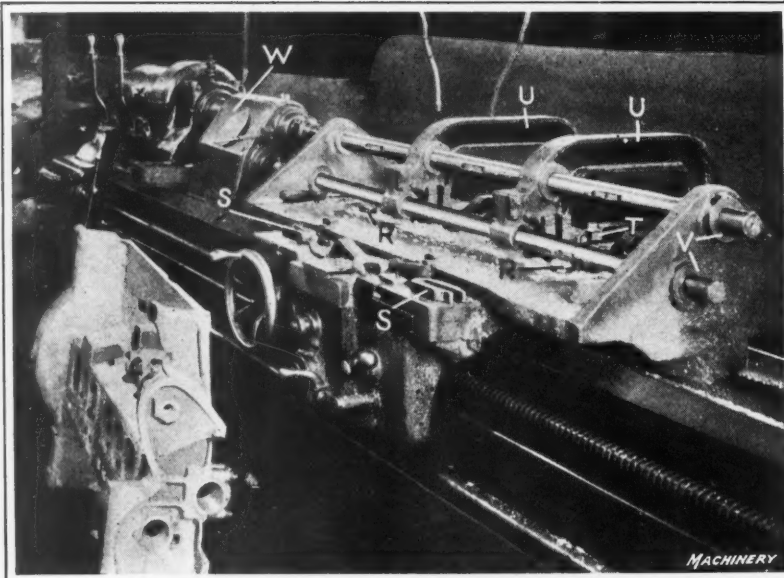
Lathe equipped with Work-holding Fixture and Duplex Head for simultaneously reaming Crankshaft and Camshaft Bearings of Chandler Crankcases
